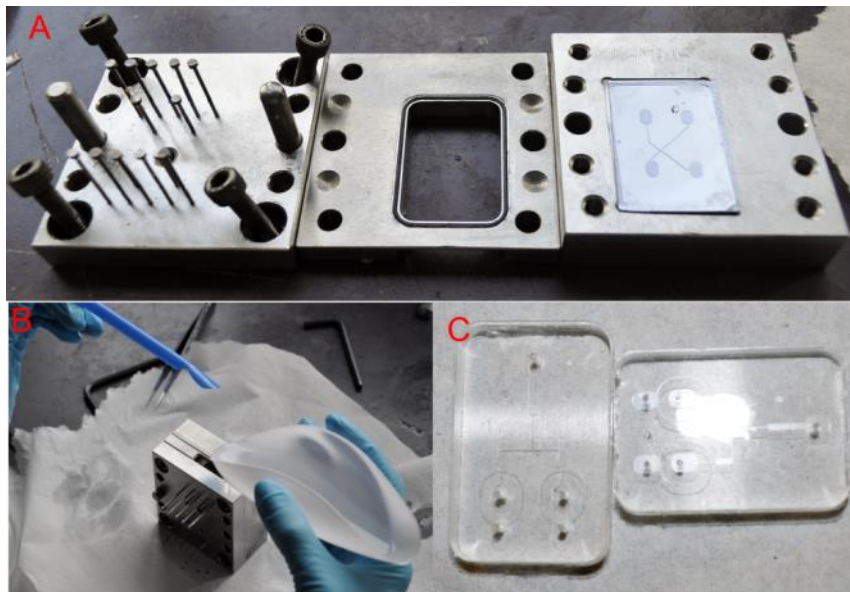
Picture (A) shows the steel mold for preparation the chip, step of filling the chuck is presented (B) and picture (C) shows the PDMS chips.
